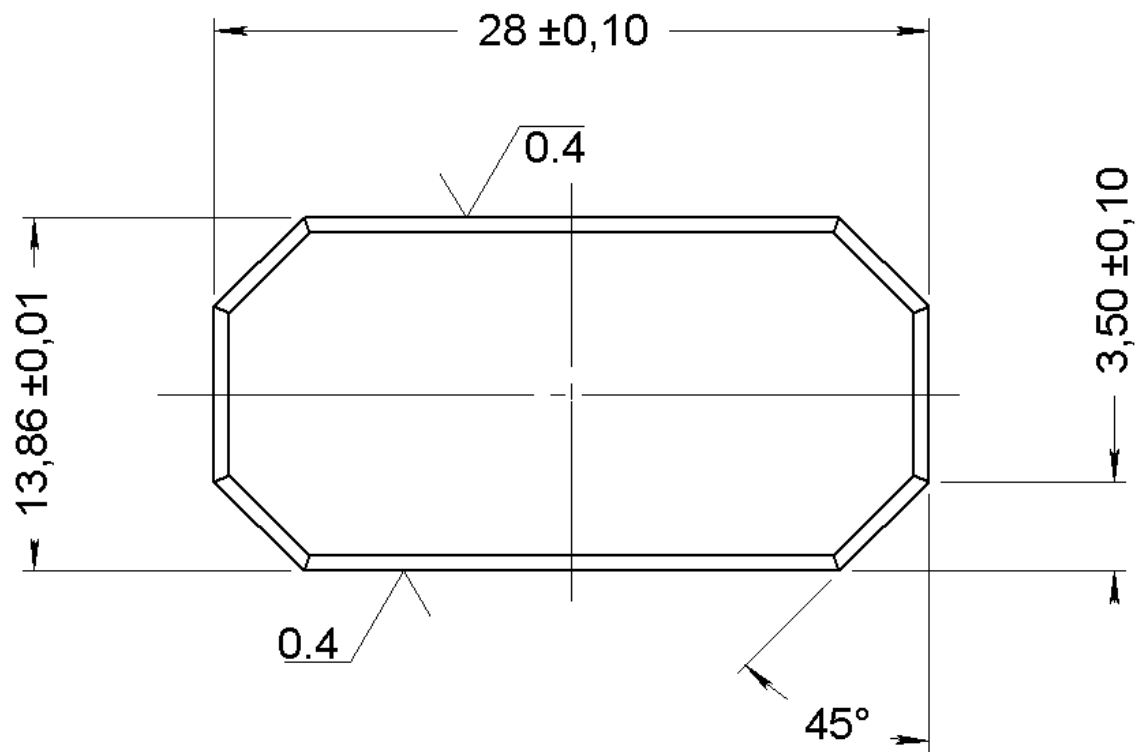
Sizing gauge for rack and panel AC connector cavities
